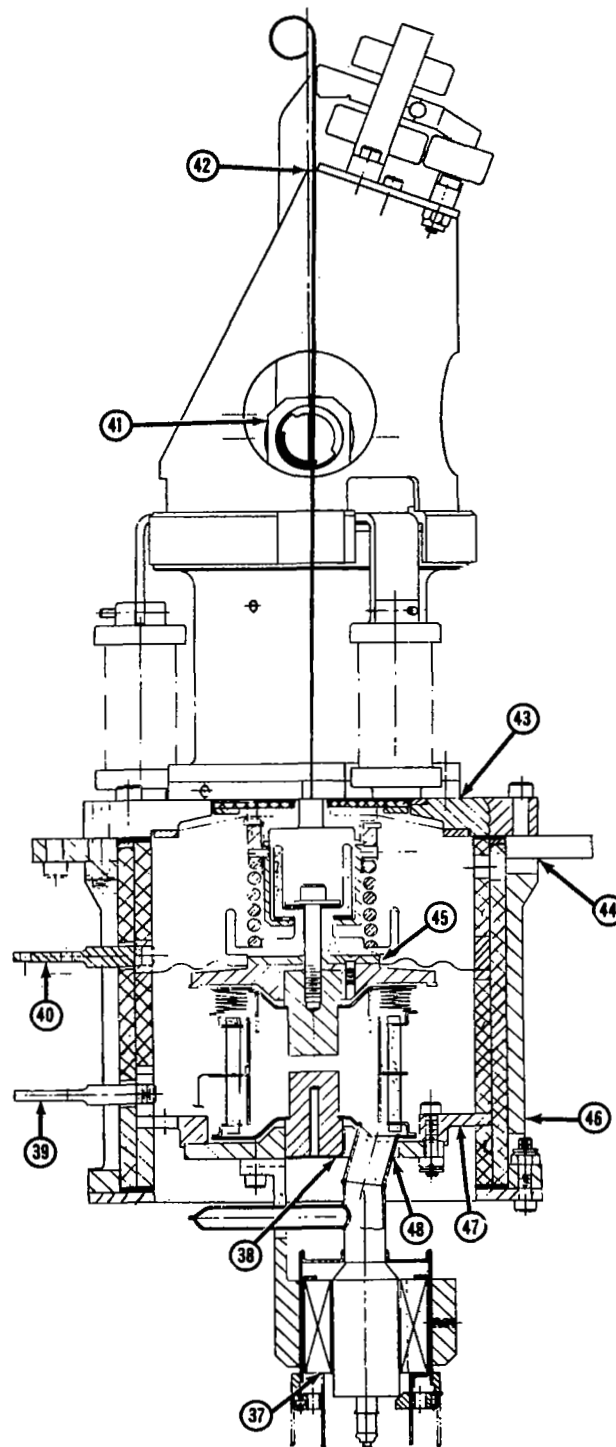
Location of Thermocouples on the DC Contactor for the Heat Run and Endurance Test.
